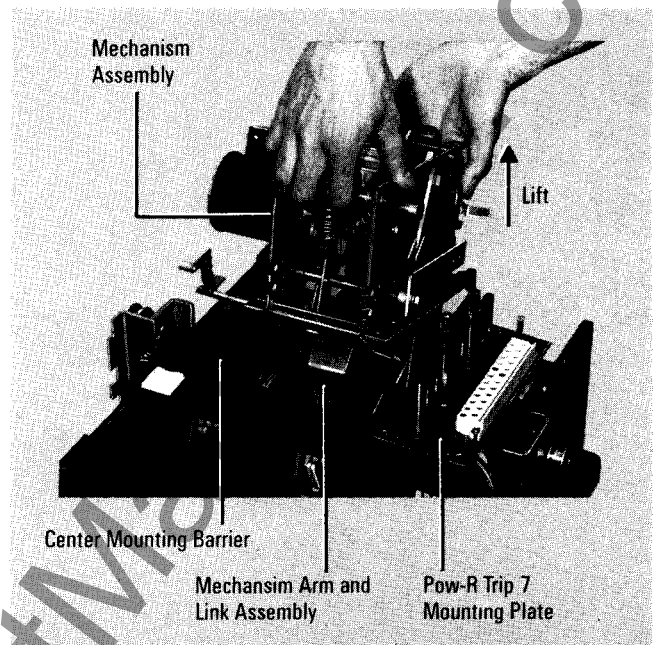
Removing Operating Mechanism From Breaker Frame.
